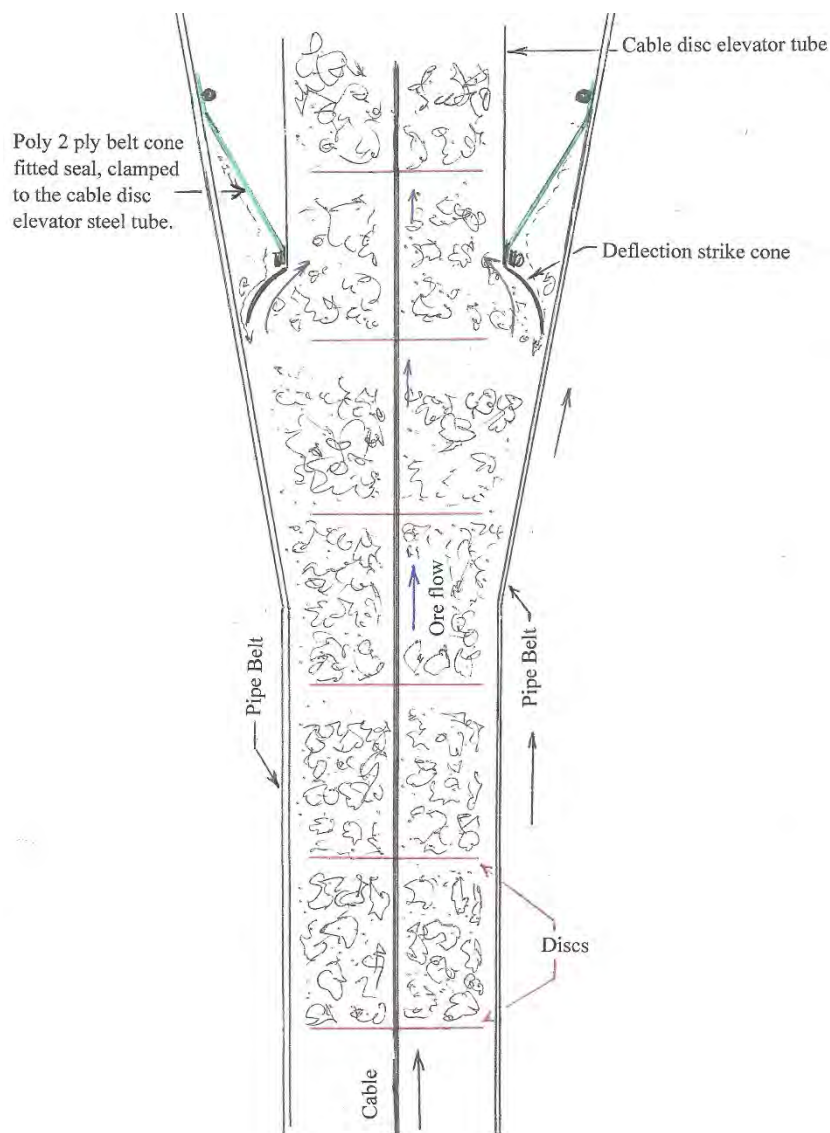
Pipe conveyor transition of the ore into the cable disc elevator at the top of the elevator
